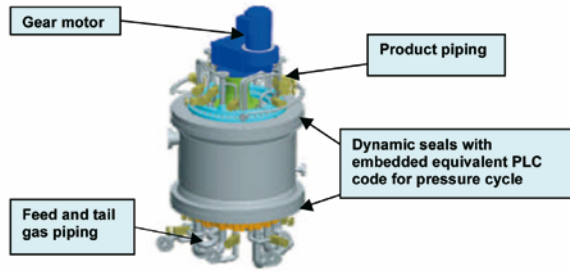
QuestAir RCPSA H-6200 module housing with bed rotor assembly.
